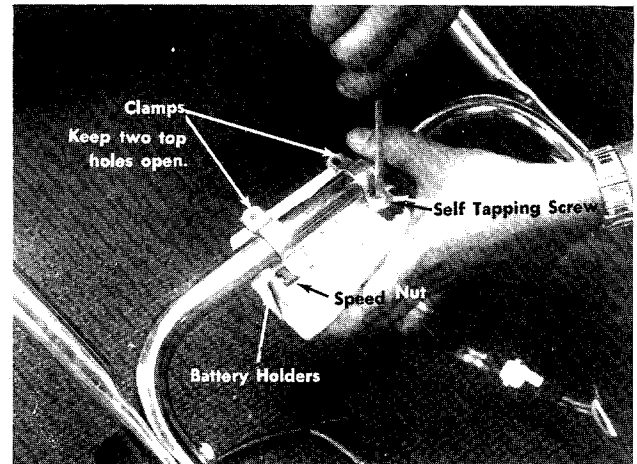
ASSEMBLY OF BATTERY PACK TO HANDLE
